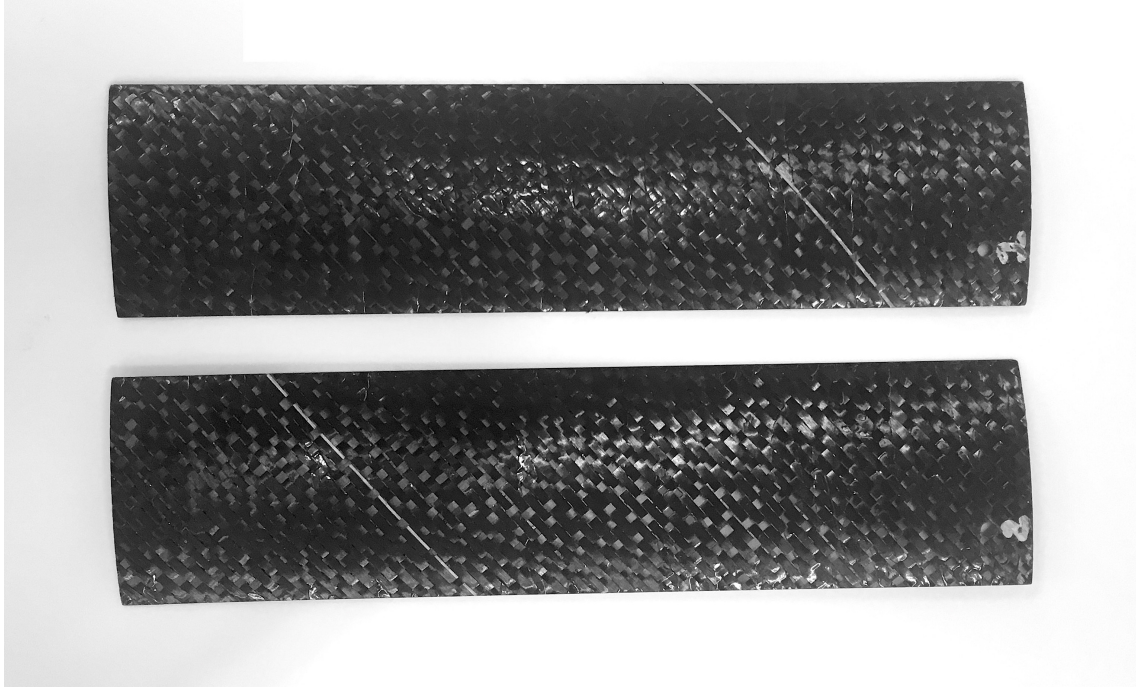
6% Camber 2% Thick Composite Blades.
